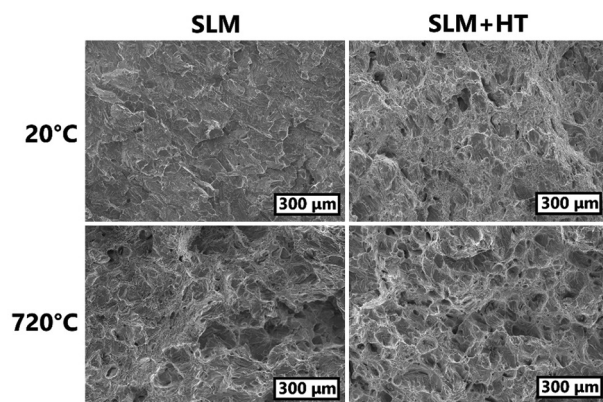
Fracture surfaces of samples after SLM without and with heat treatment after tensile testing at 20°C and 720°C. Magnification: $\times 100$ Abbreviation: SLM: Selective laser melting
